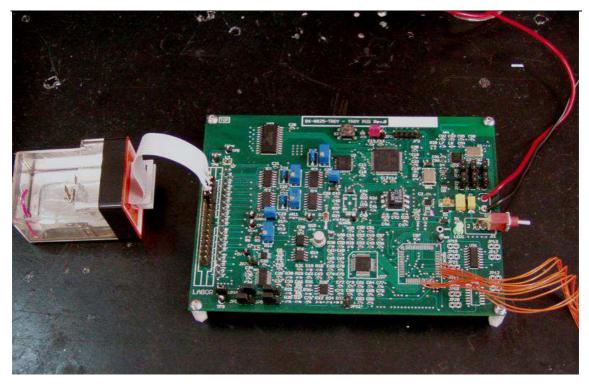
Troy UEC rev.0 PCB prototype assembled, under test.
